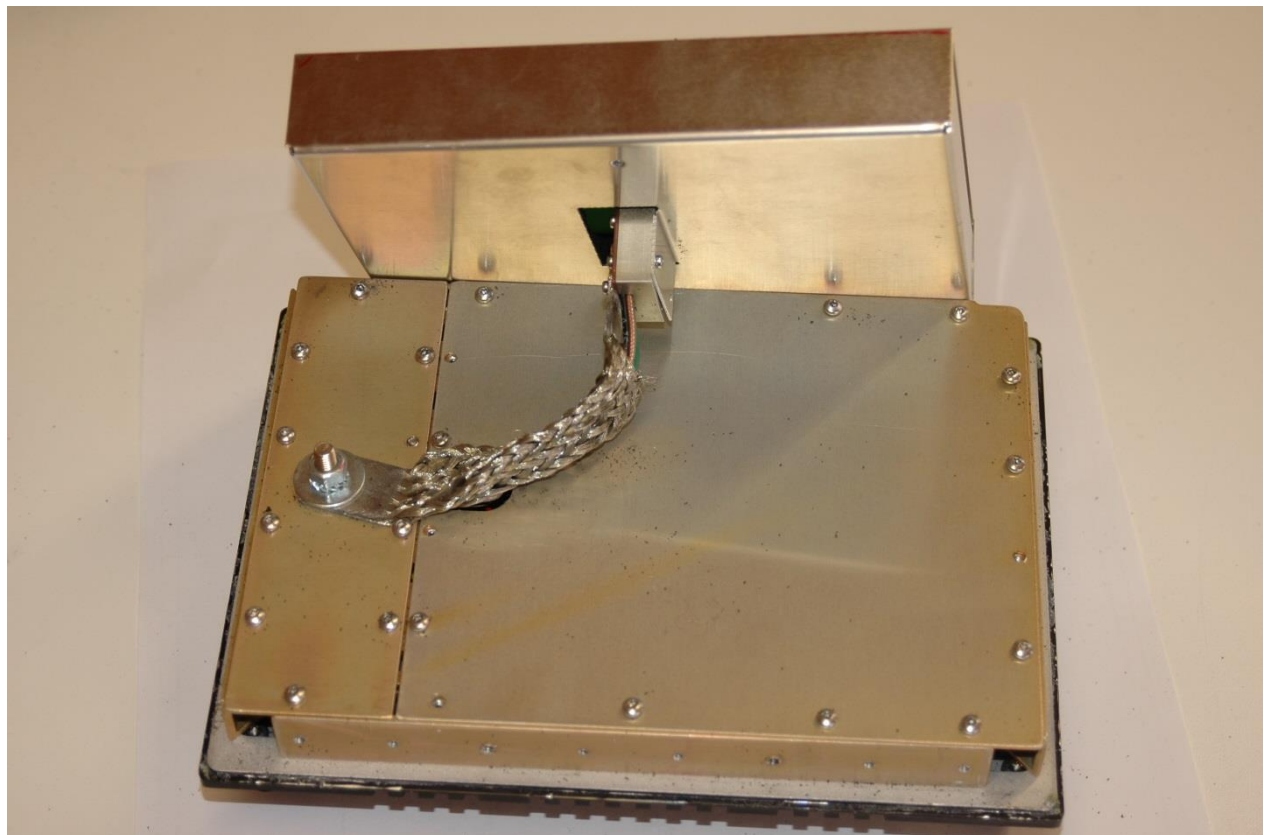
, outer metal shield and all absorbers removed, showing metal cover on electronic compartment and shielded braid covering cables to step generator board residing inside metal casing.
